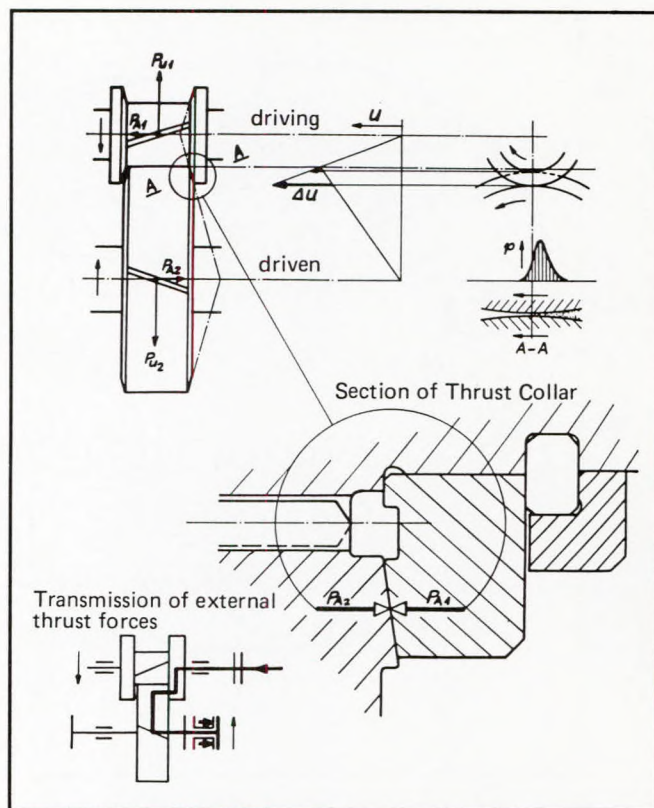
Single helical gear with thrust collar and schematic arrangement of compressor thrust transmission
